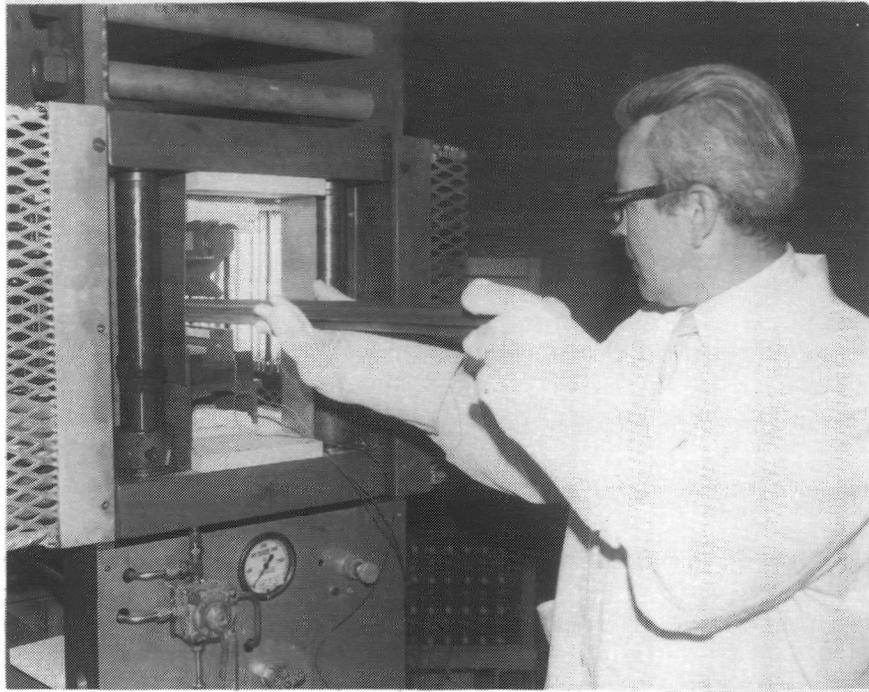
Formed Boron Aluminum Hat being Removed from Forming Press.
